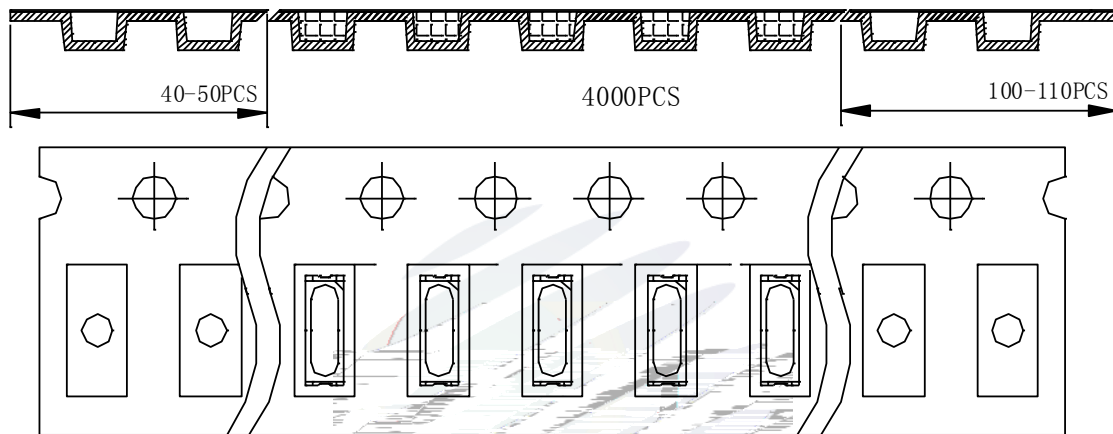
Carrier Tape Dimensions 载带尺寸
